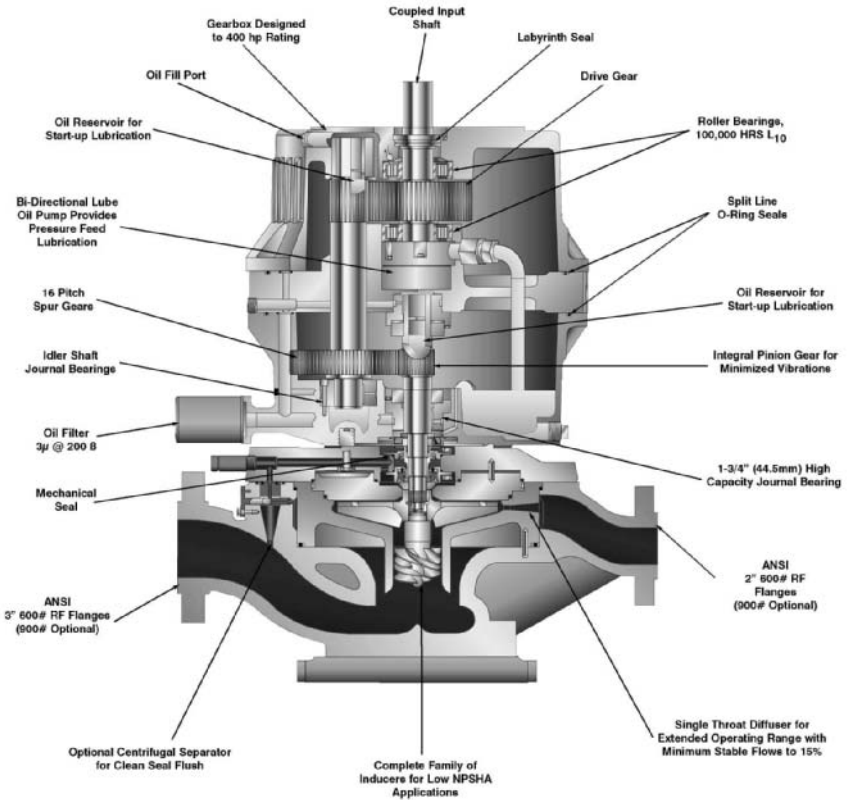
Integrally geared inline pump—API 610 Type OH6 (Sundyne Corporation)
